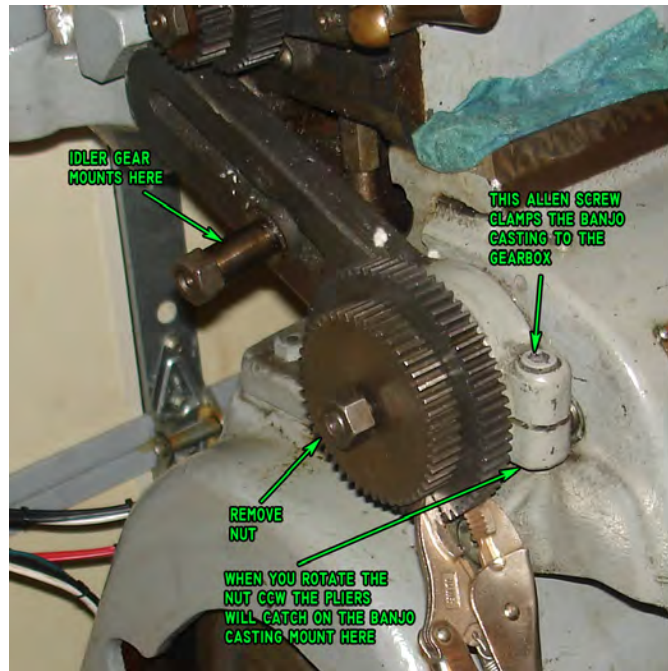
Method for removing gearbox input shaft nut. This is easier if you remove the nut before removing all the other gears.
